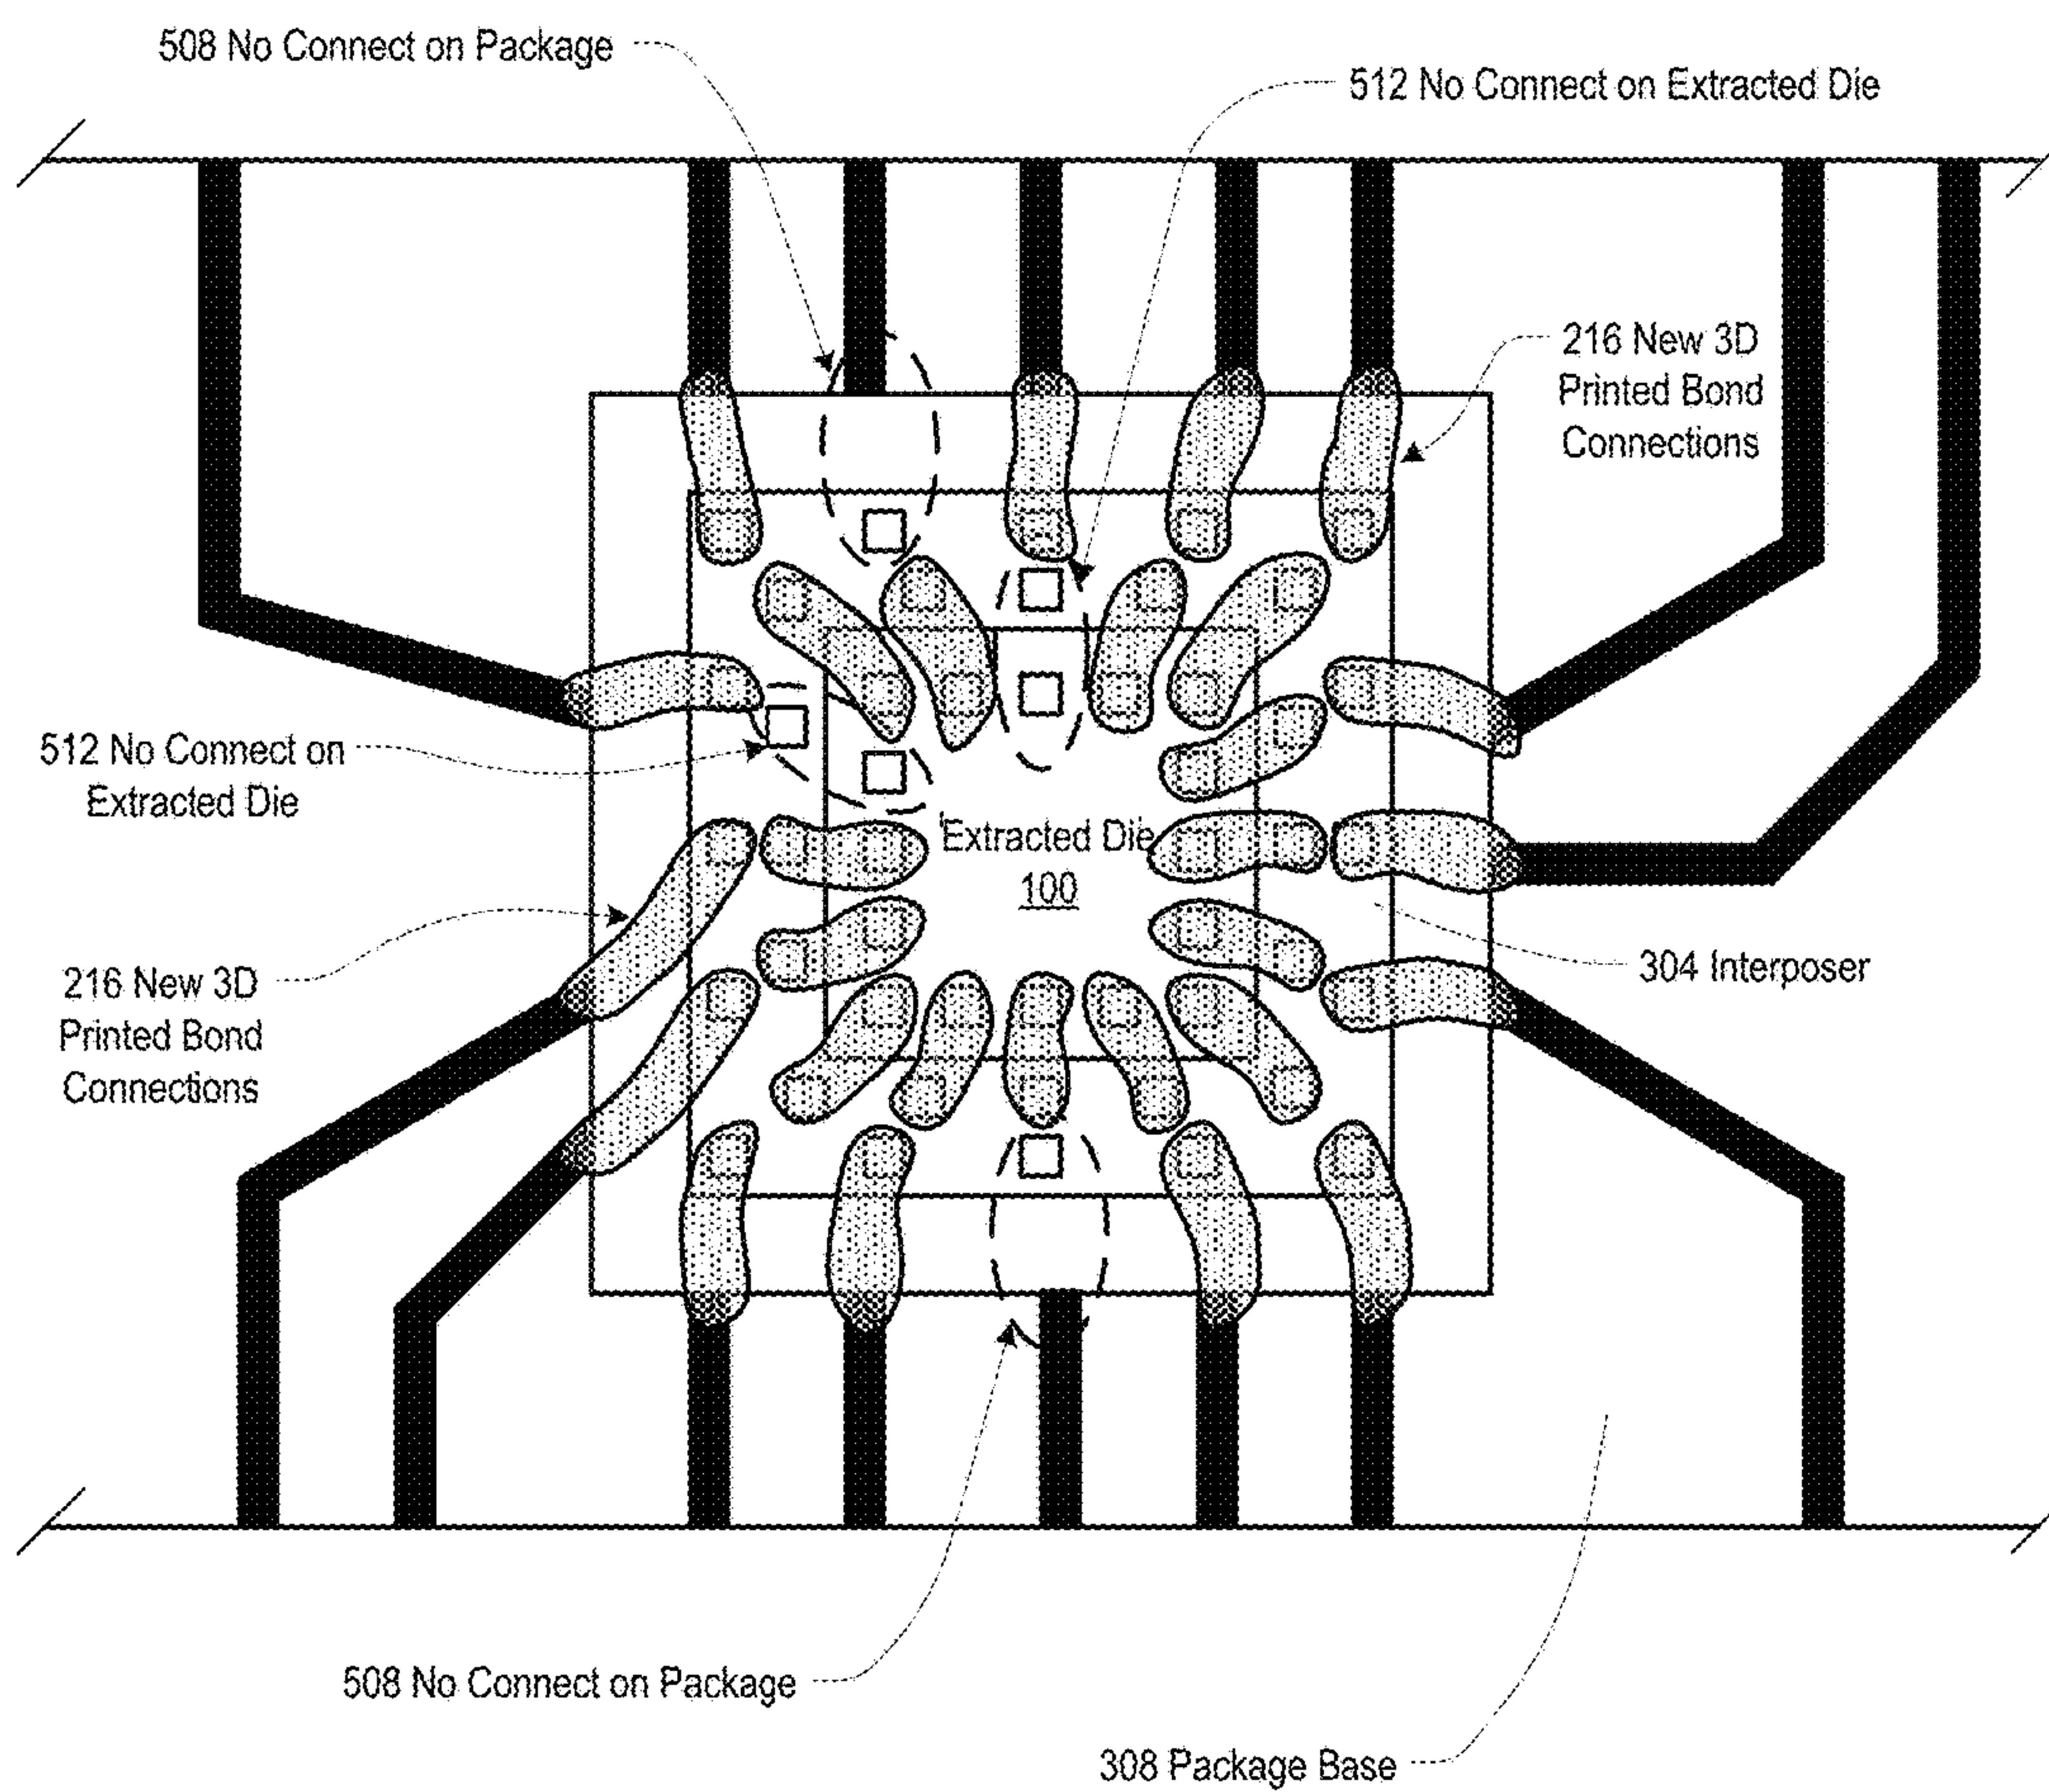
C Top View of New Package Base After 3D Printing Crossed Connections
